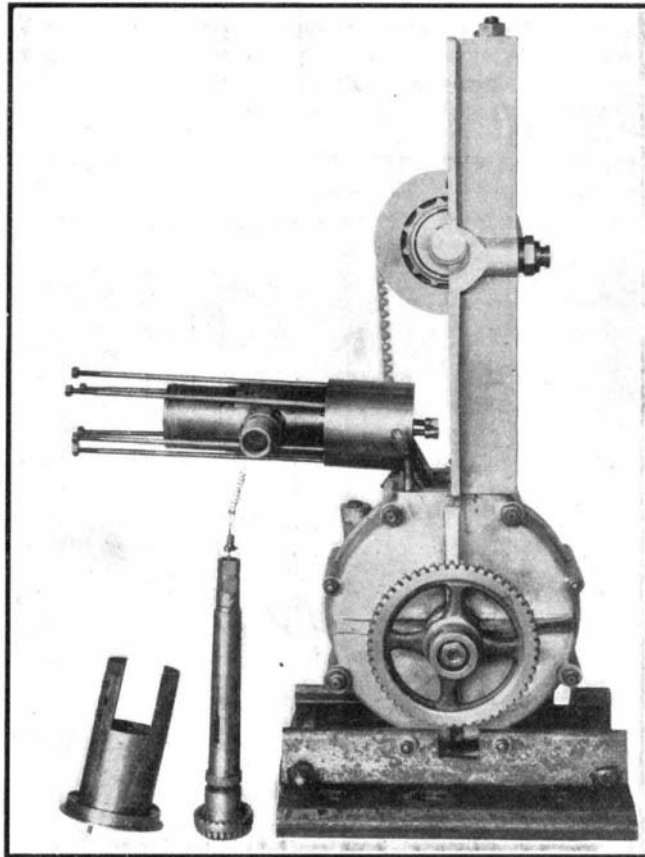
Motor With Half of Cylinder and Rotary Valve Removed.
